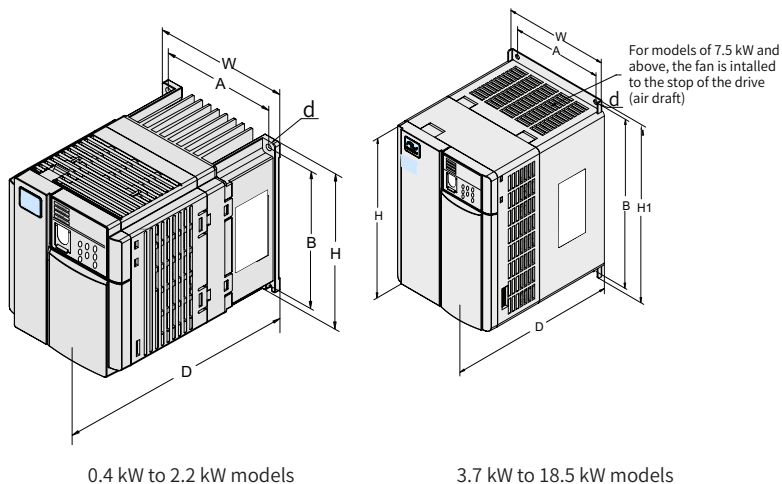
Outline and mounting dimensions of MD310 series drives
